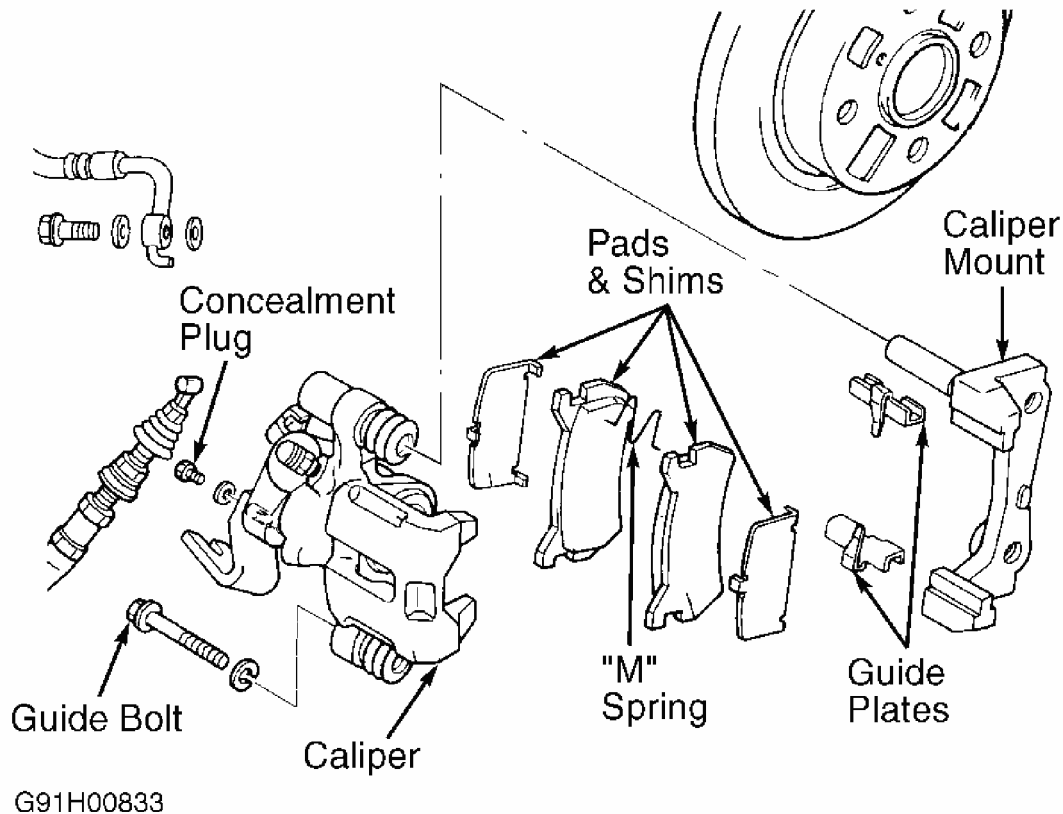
Exploded View Of Rear Disc Brake Assembly
